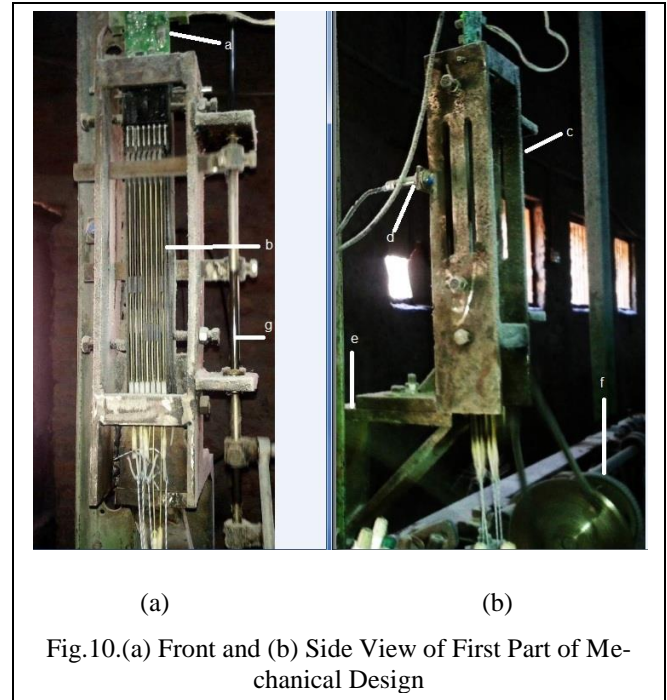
(a) Front and (b) Side View of First Part of Mechanical Design
